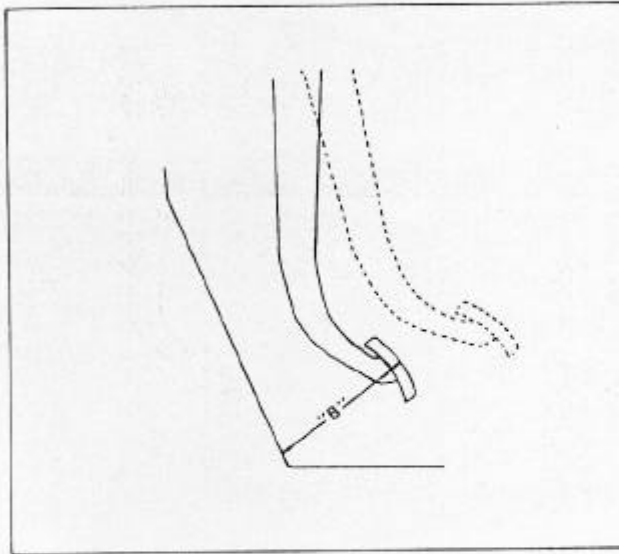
21 BRAKE PEDAL-TO-WALL CLEARANCE MEASUREMENT
